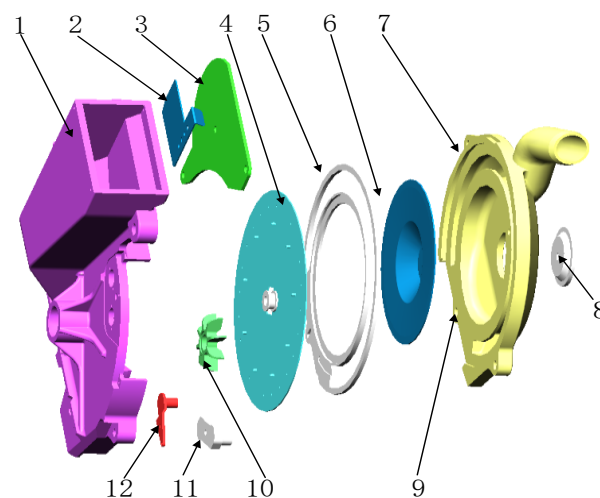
Pneumatic seeding mechanism. 1. seed storage box; 2. seed stopper; 3. seed scraper; 4. seed row disc; 5. seal ring; 6. seal disc; 7. negative pressure inlet; 8. gasket; 9. positive pressure hole; 10. seed stirring wheel; 11. seed paddle; 12. seed stirring wheel bracket.
